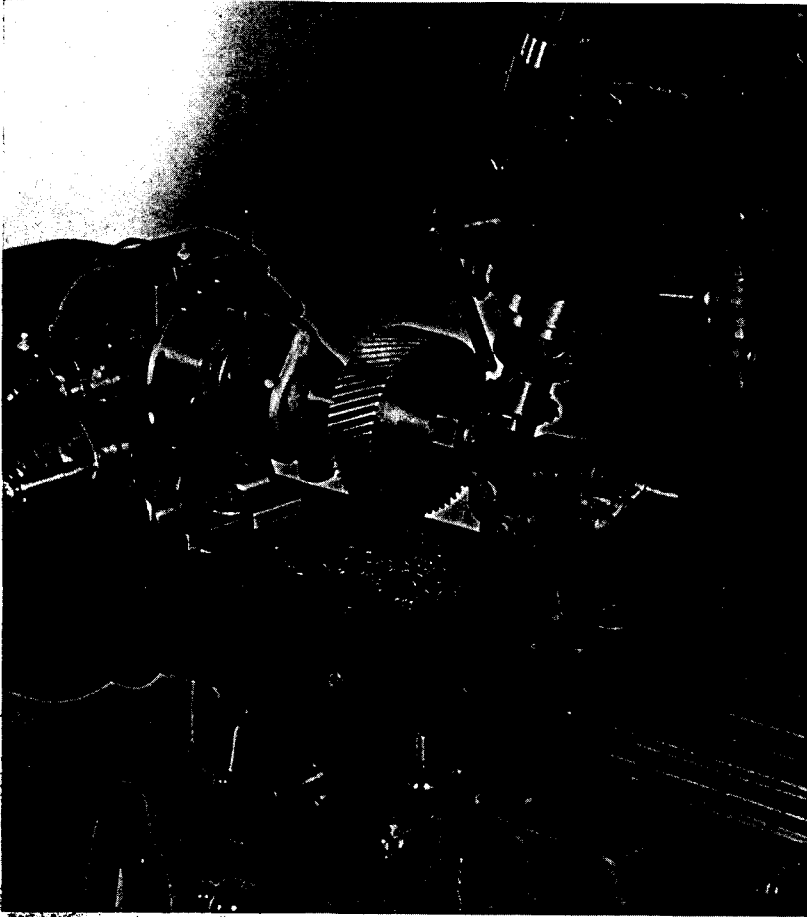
This gear-cutting job is typical of the spiral work that can be done on the Vertical machine using Universal Spiral Index Centers. The spindle head of the machine is swiveled to the angle of spiral, and the table is adjusted vertically to bring the work centers in line with the center of the cutter.
